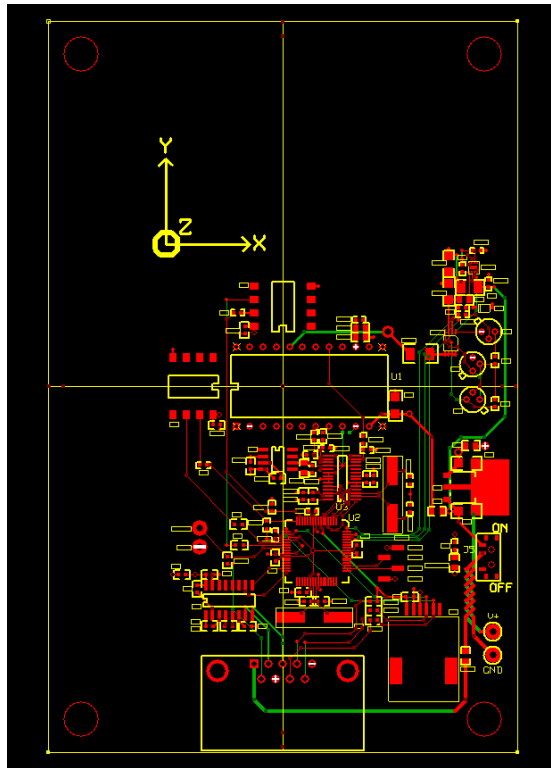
PCB layout of magnetometer/inclinometer circuit board.
